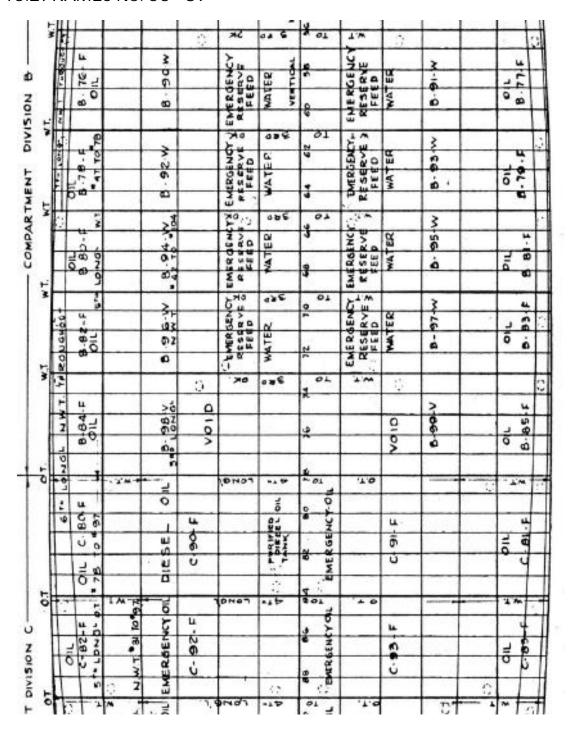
Layout of Inner Bottom Tankage (Frames No. 56 – 89)
